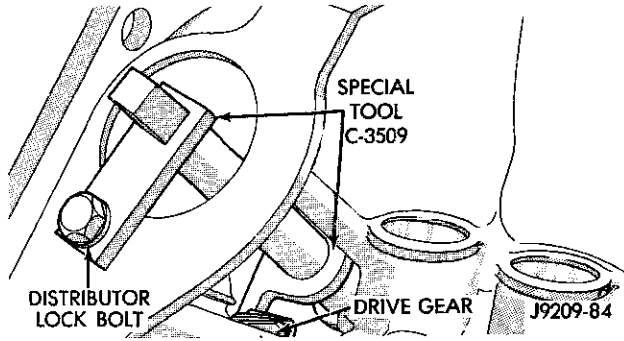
Camshaft Holding Tool C-3509 (Installed Position)
